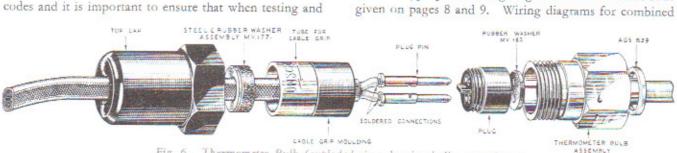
Thermometer Bulb (exploded view showing bulb connections)
